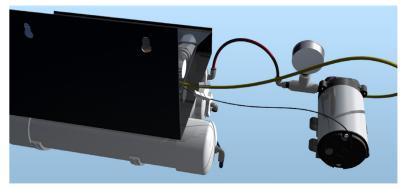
, Connection of pump to pre-wired plug on the Main Assembly
